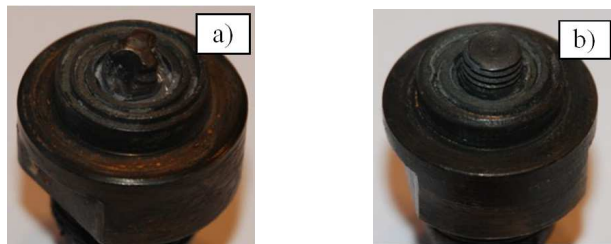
FSP tool used during experiments: a) Triflute tool, b) conventional tool.
